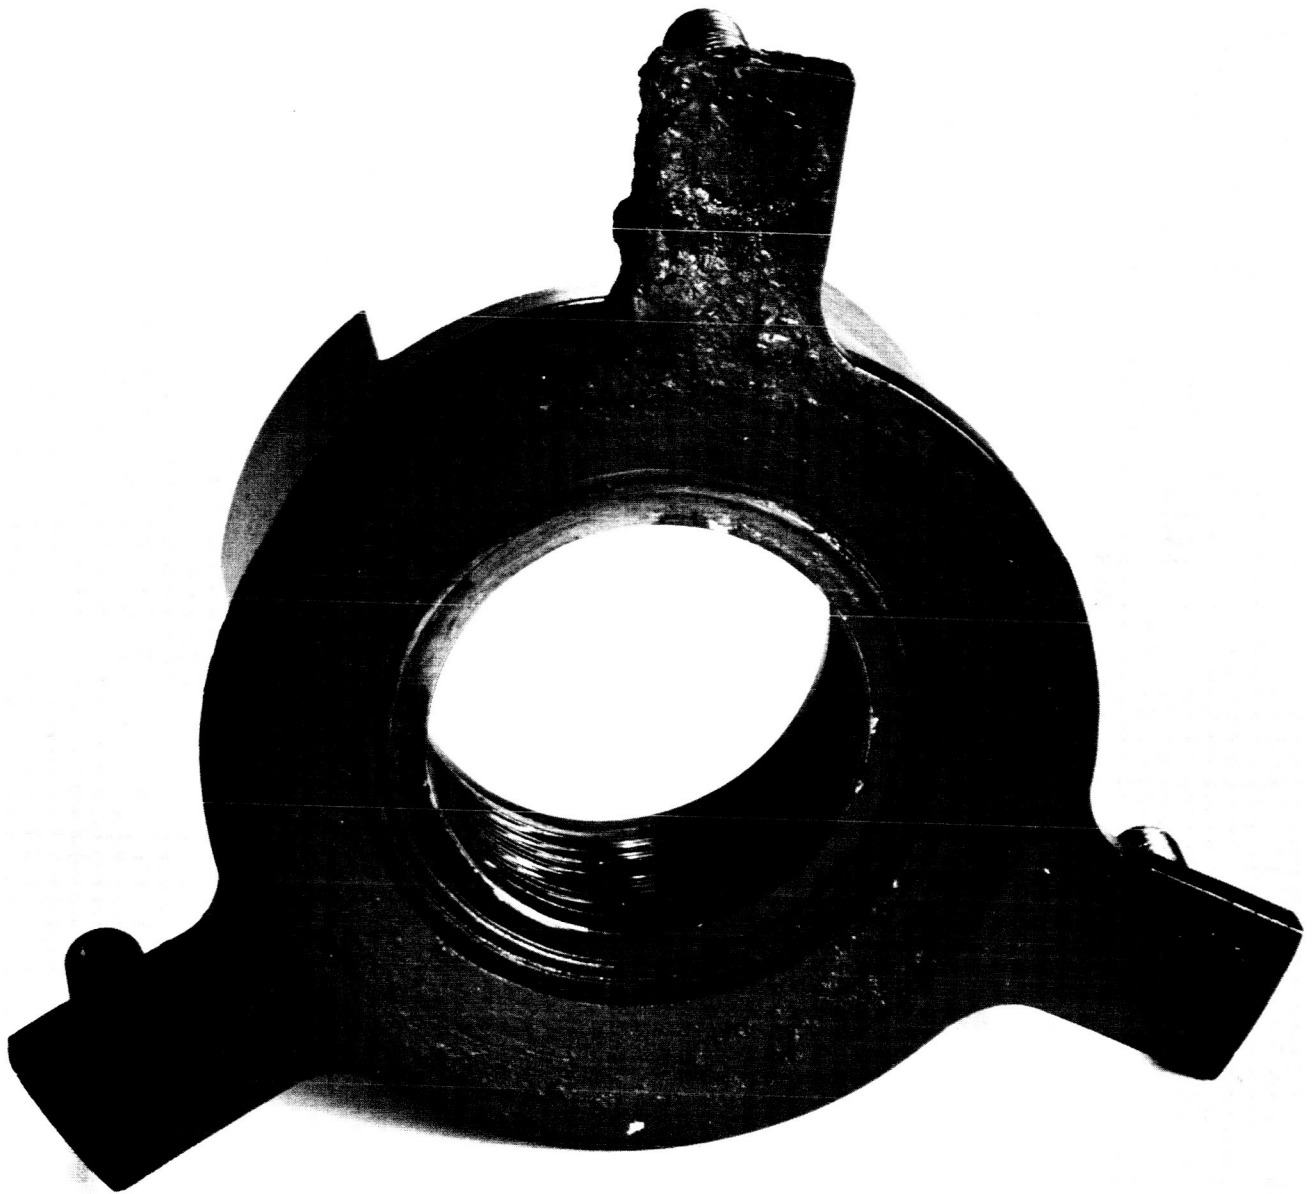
SEAL CARTRIDGE SHOWING OIL LEAK
